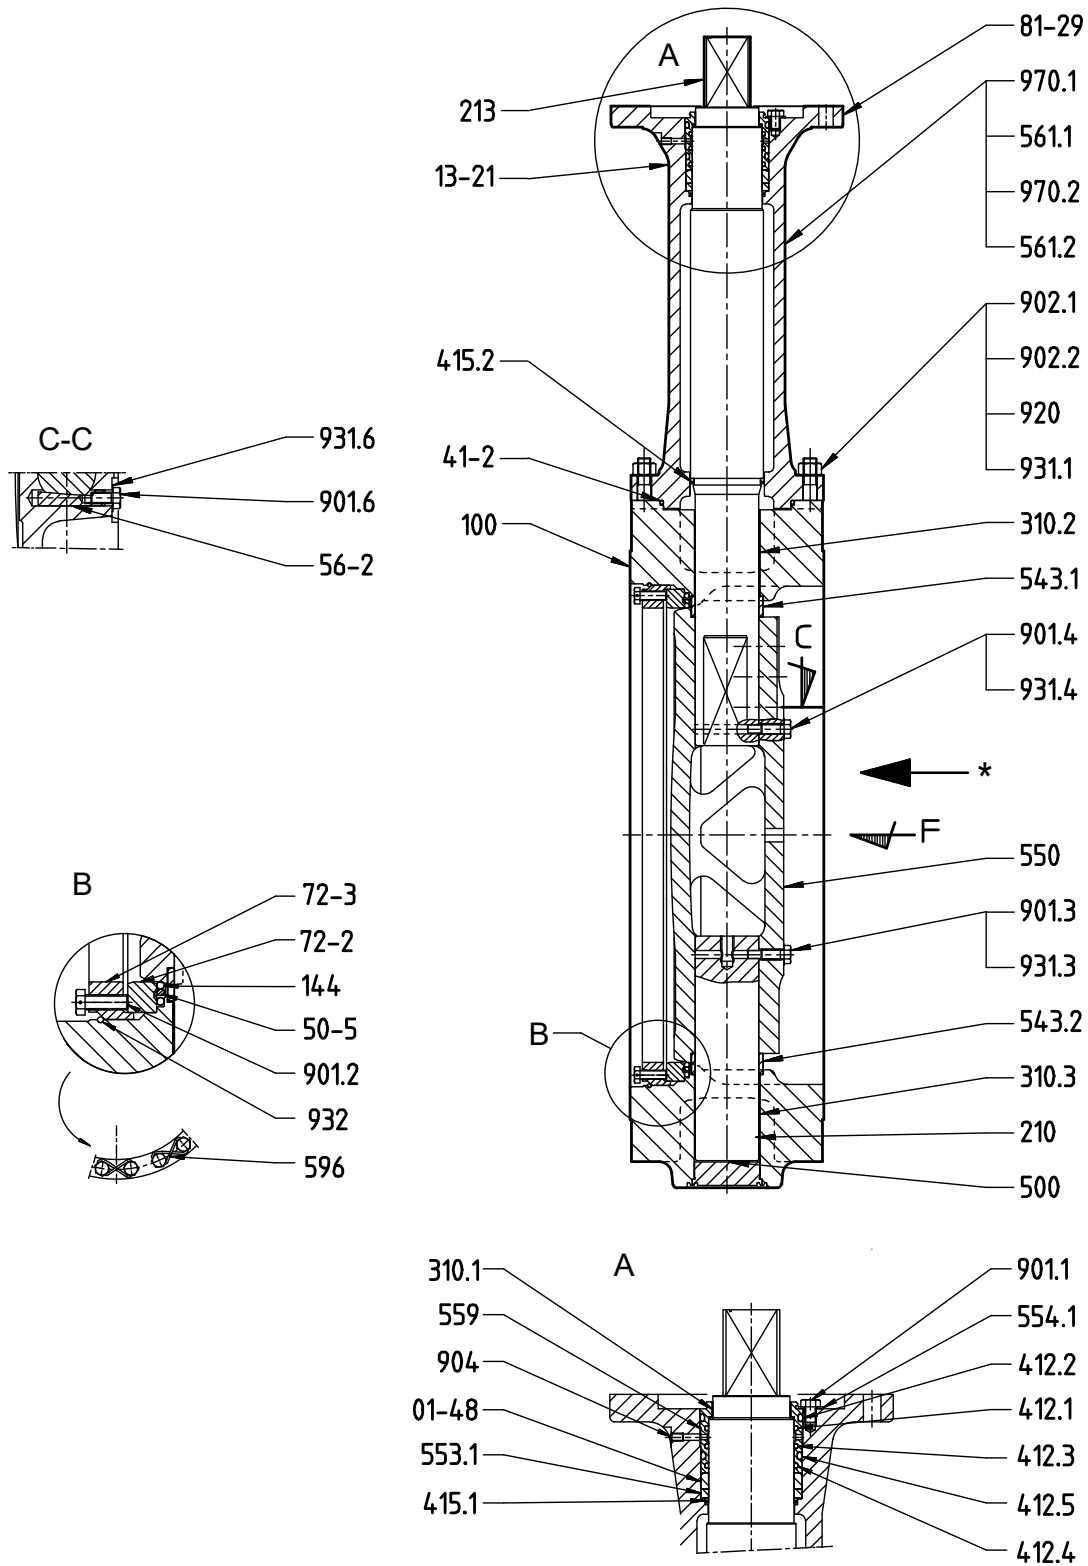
Sectional drawing of TRIODIS 150 CRYO T7 - DN 750-850 (30-34 inch)
